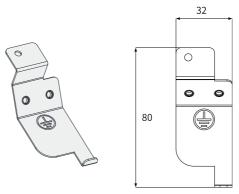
Dimensions of EMC shielding bracket for the power supply unit
